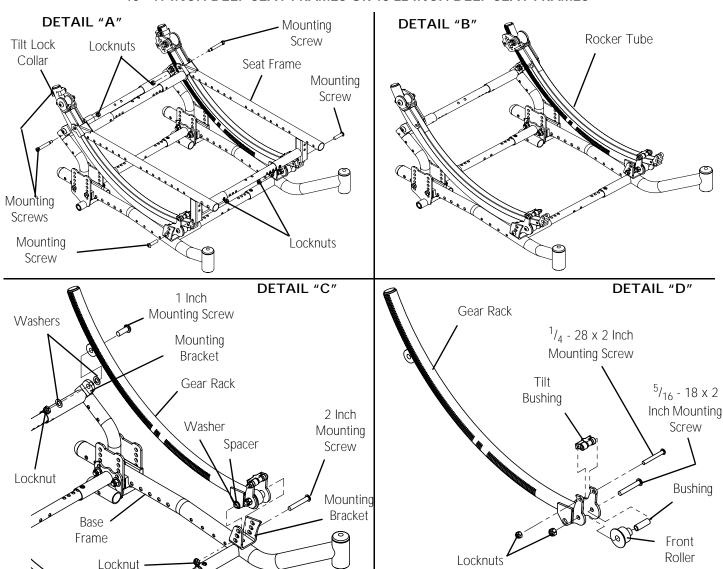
Removing Gear Rack for 12-16 inch Deep Seat Frames
